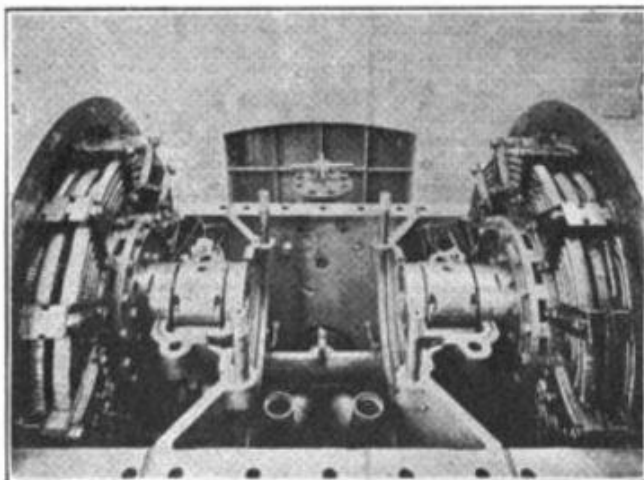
1000-KW BRUSH-LJUNGSTRÖM SET WITH TURBINE REMOVED
